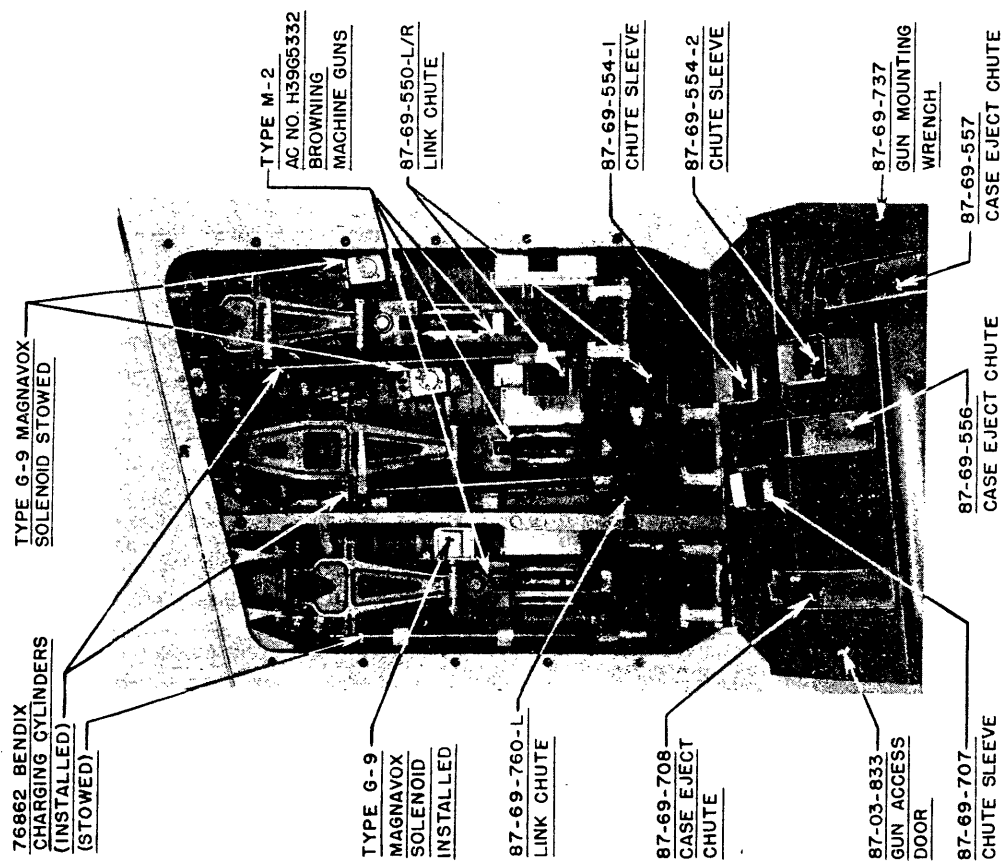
Wing Guns - Bottom View - Gun Access Door Open
